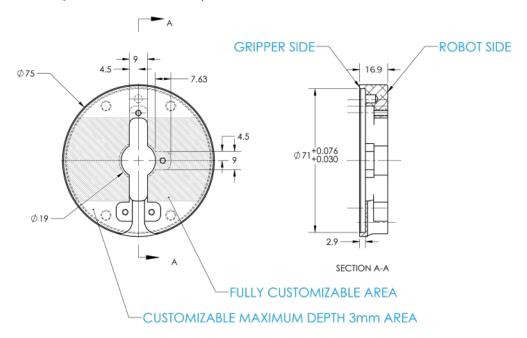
Blank coupling AGC-CPL-BLANK-002 workable area dimensions.
